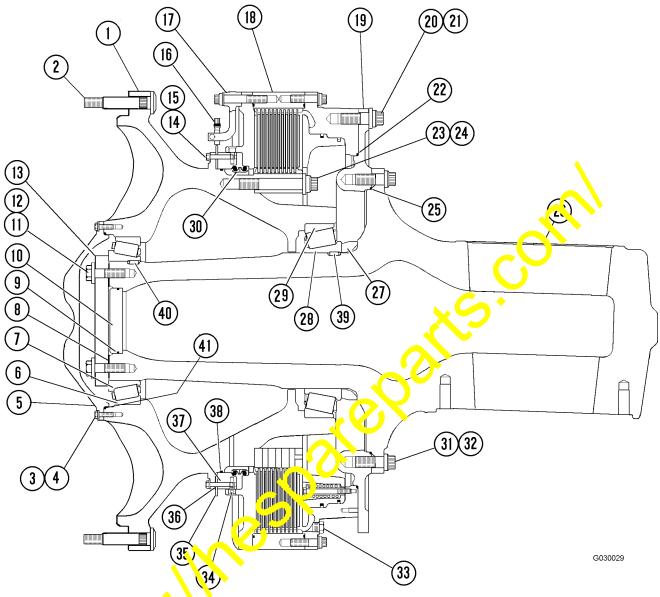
Front Wheel Spindle, Hub, and Brake Assembly
